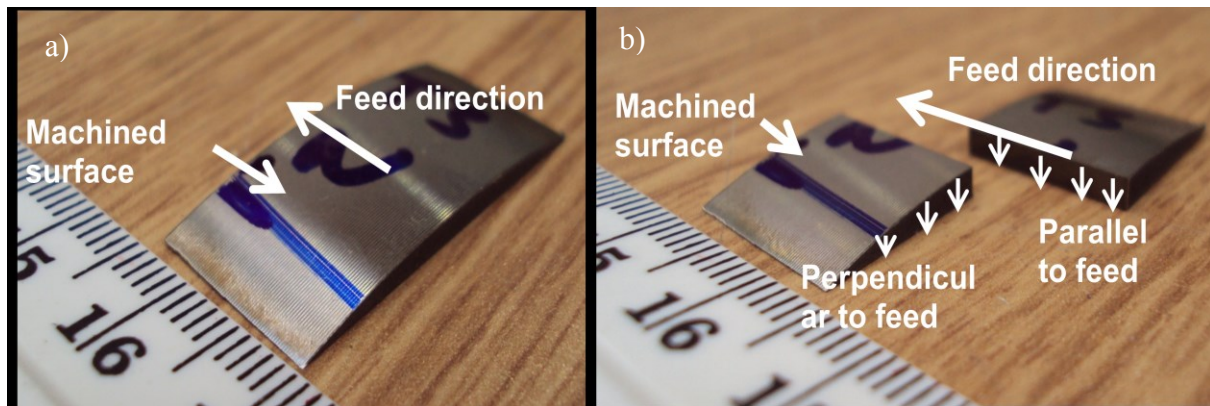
(a) Machined sample and (b) directions for surface integrity assessment
